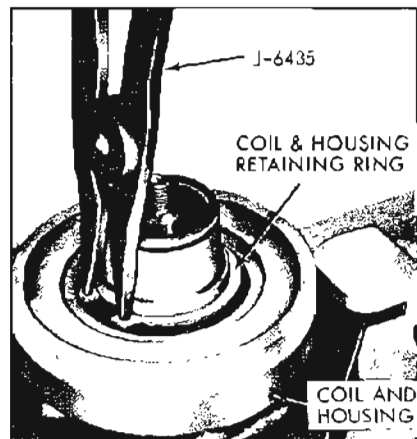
Removing and Installing Coil and Housing Retainer Ring
